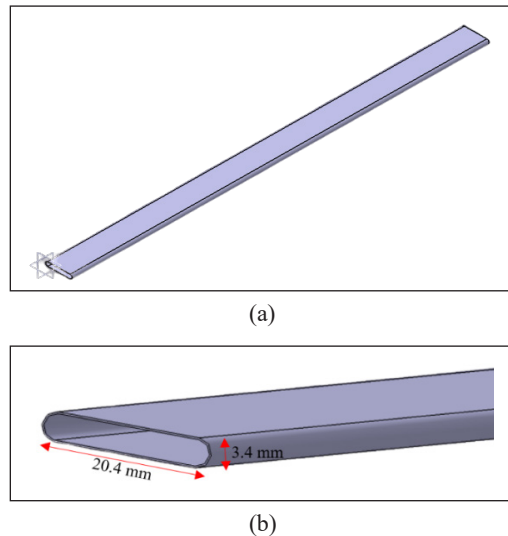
(a) Isometric view of the flat tube; and (b) dimensions of the inlet
